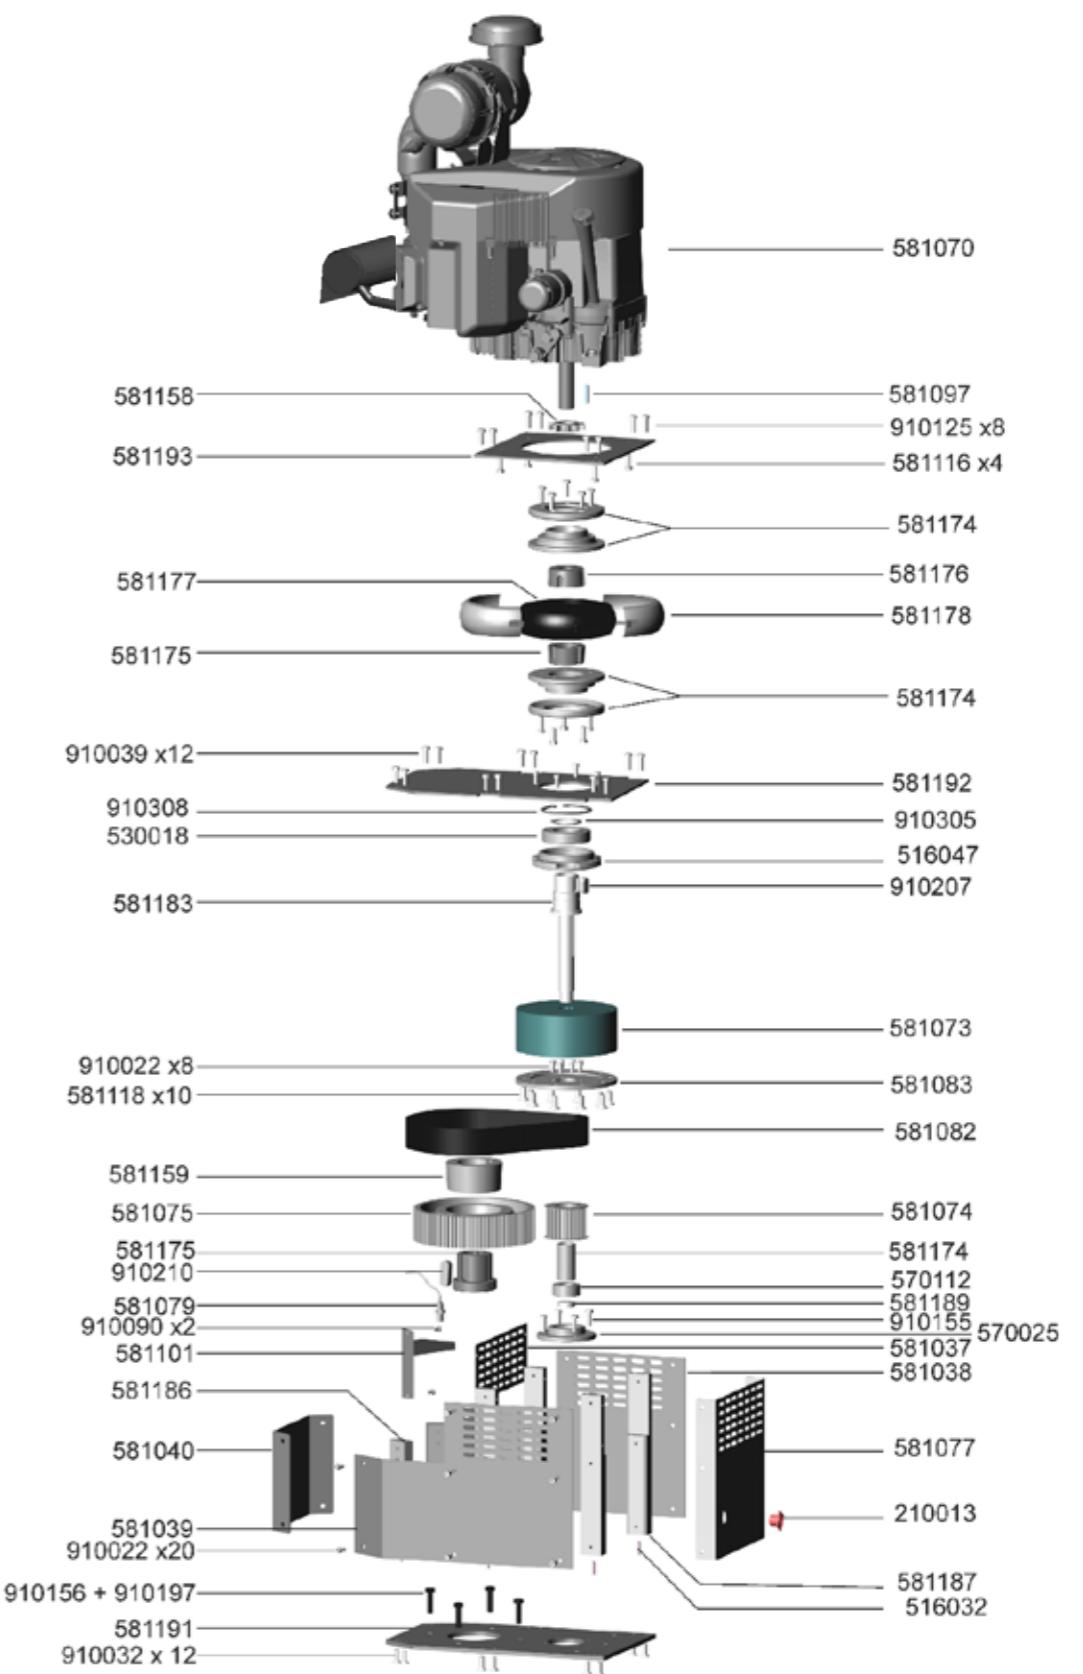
Grinding Spindle with 2 pulleys (1pcs)
